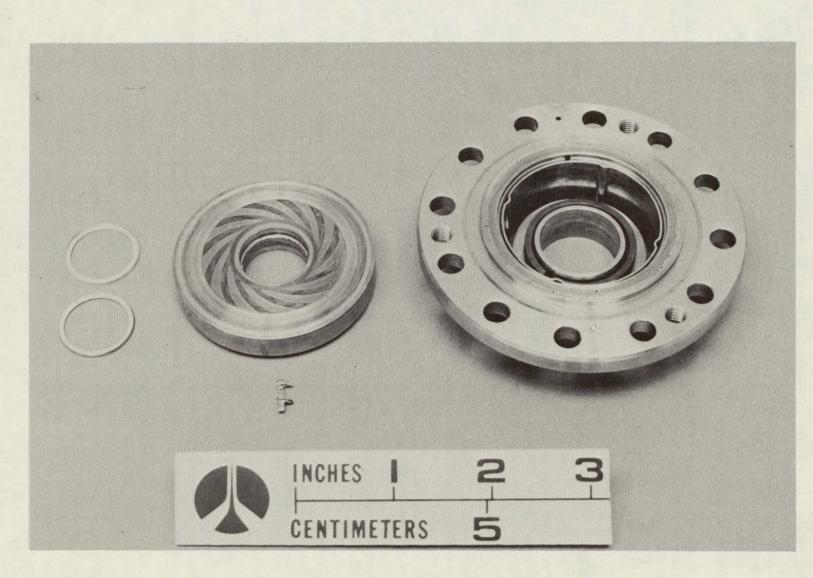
Spiral Groove LOX Seal Carbon Ring (Posttest 186 Spinup)
